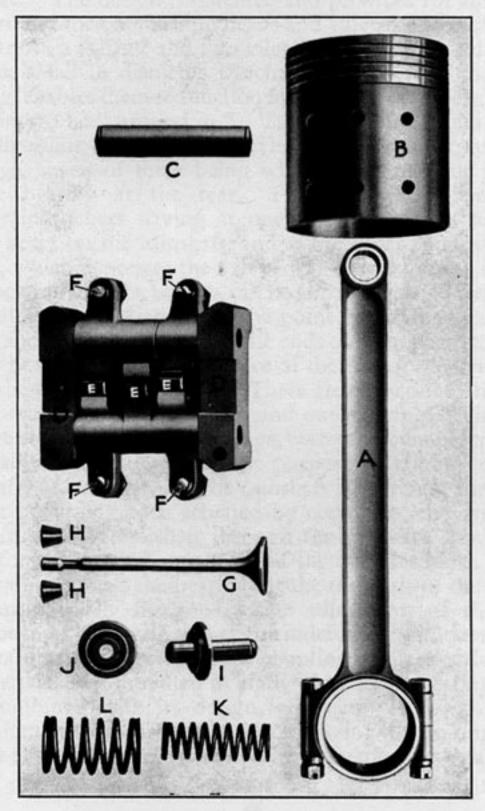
VALVE PARTS, CONNECTING ROD, PISTON, ETC.
